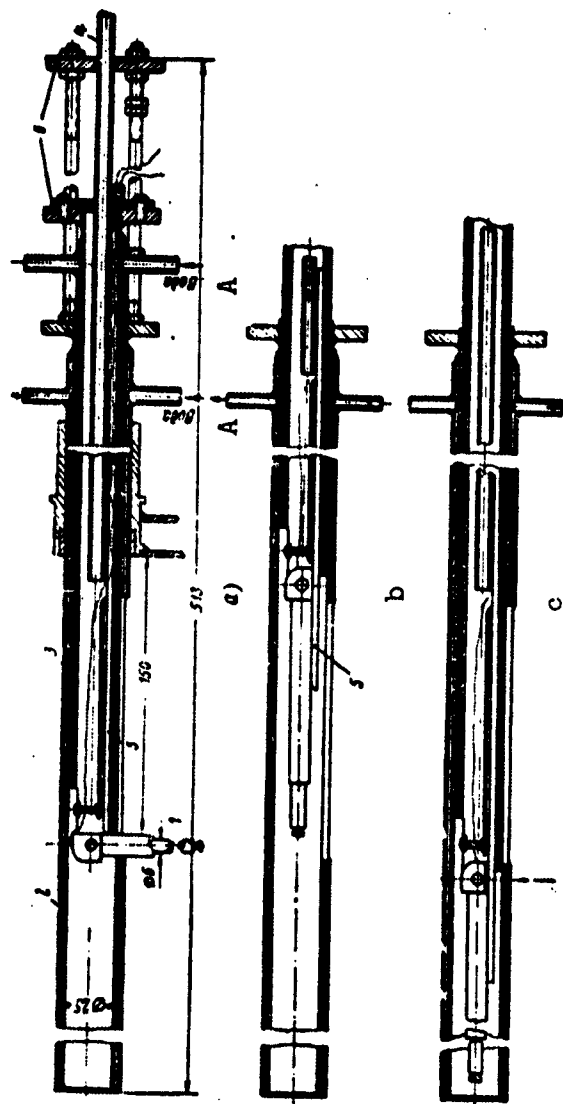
"Vertical" thermocouple. 1) Thermocouple; 2) outer housing; 3) inner housing; 4) tube for air supply; 5) supporting pin; 6) flanges. A) Water.
